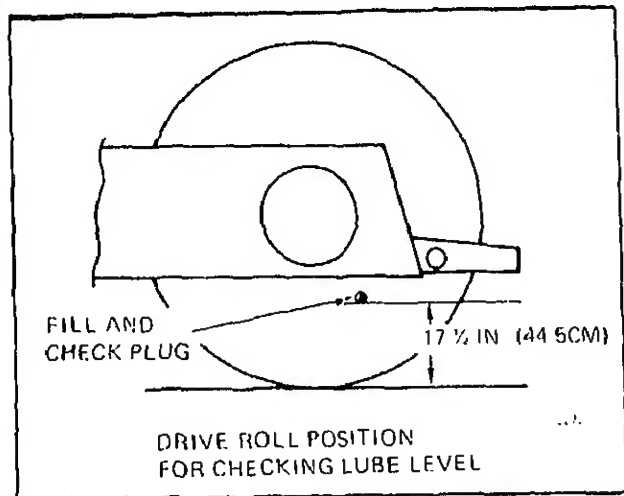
A. SERVICING C350B FINAL DRIVE ASSEMBLY.
